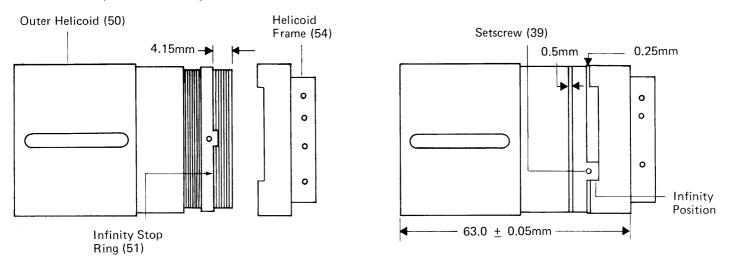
Assembly of Infinity Stop Ring and Helicoid Frame on Outer Helicoid
